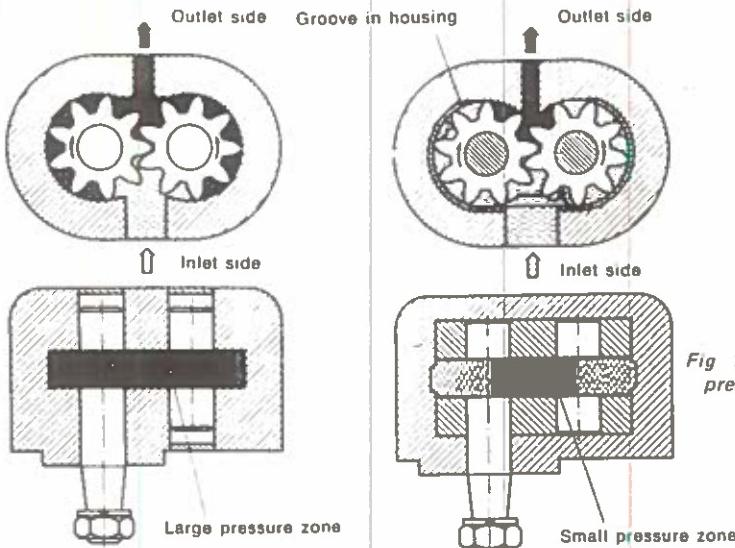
Simple gear pump (left) and pressure-compensated (double-gland) gear pump (right). (Bosch).
